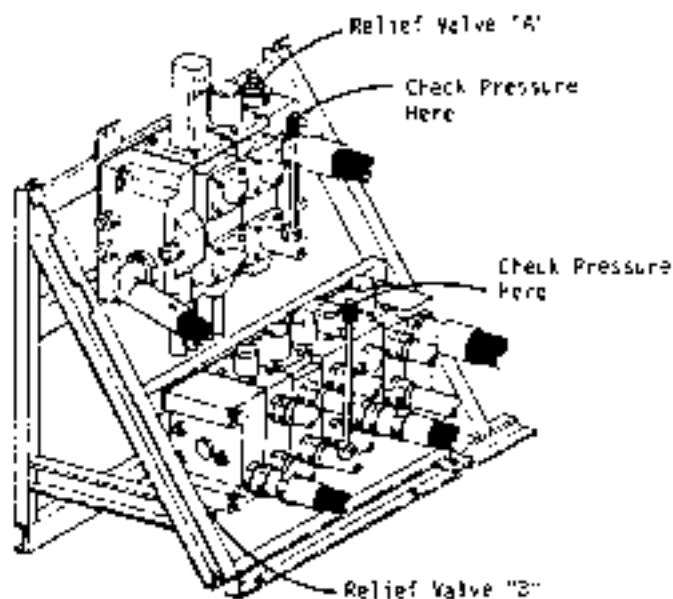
Control Valve Assembly (Later models with separate quick disconnects)
